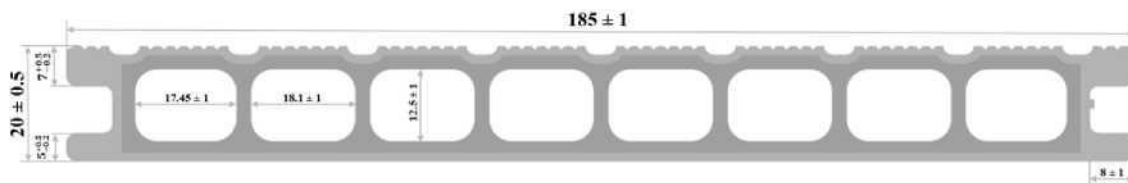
GAMRAT WPC Decking Board 185x20 mm, single-sided grooved
